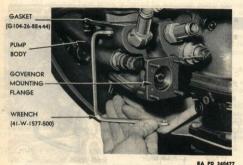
Removing Oil Pressure and Oil Scavenger Pump
